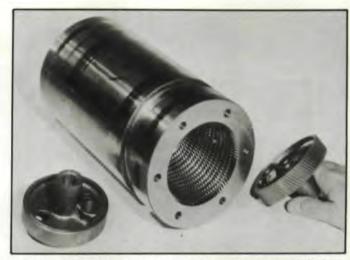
A solid HHS pot broaching tool that produces external helical cast iron running gears.
